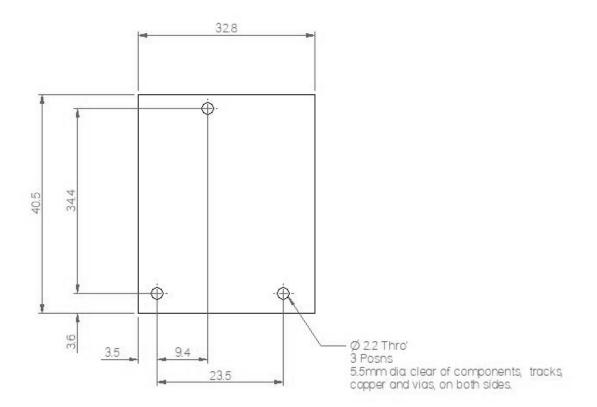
Mechanical overview of the Harrier PoE Connection Board; all dimensions in mm.
